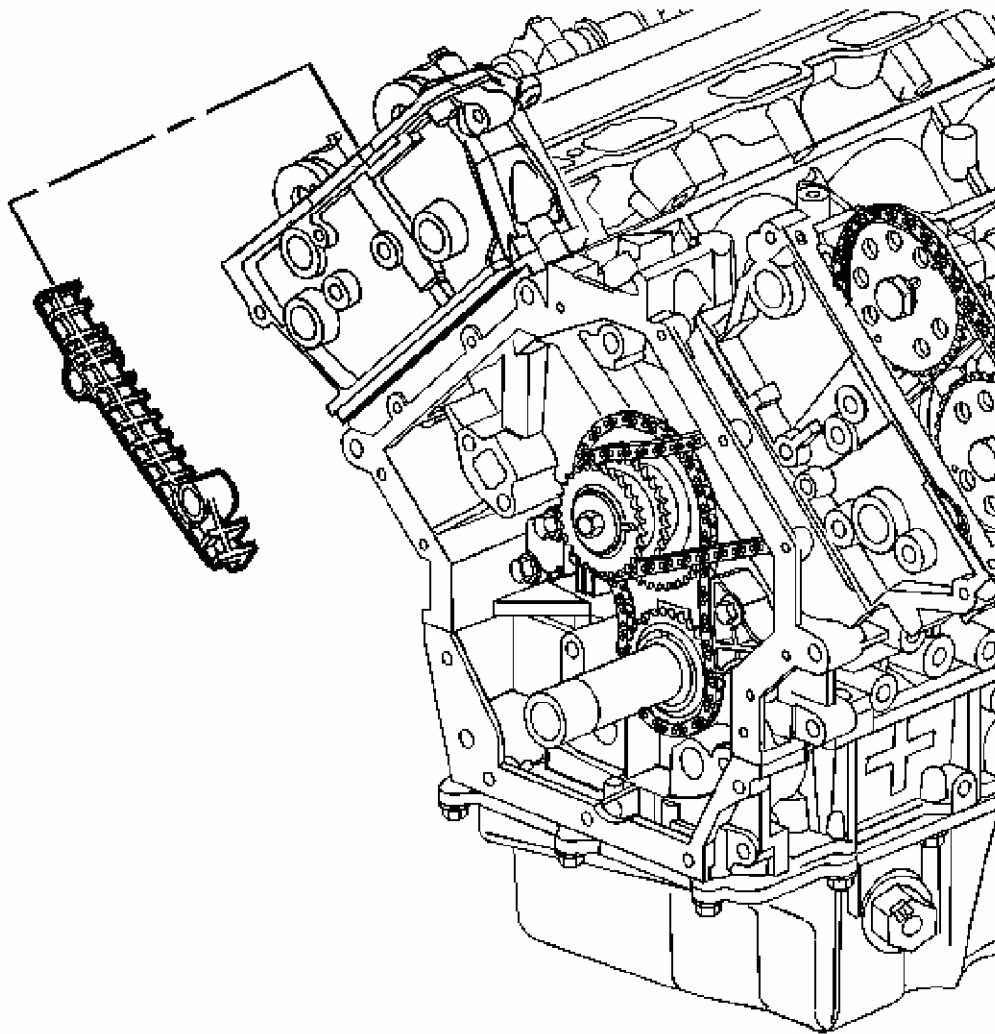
View of Right Secondary Camshaft Drive Chain Guide
